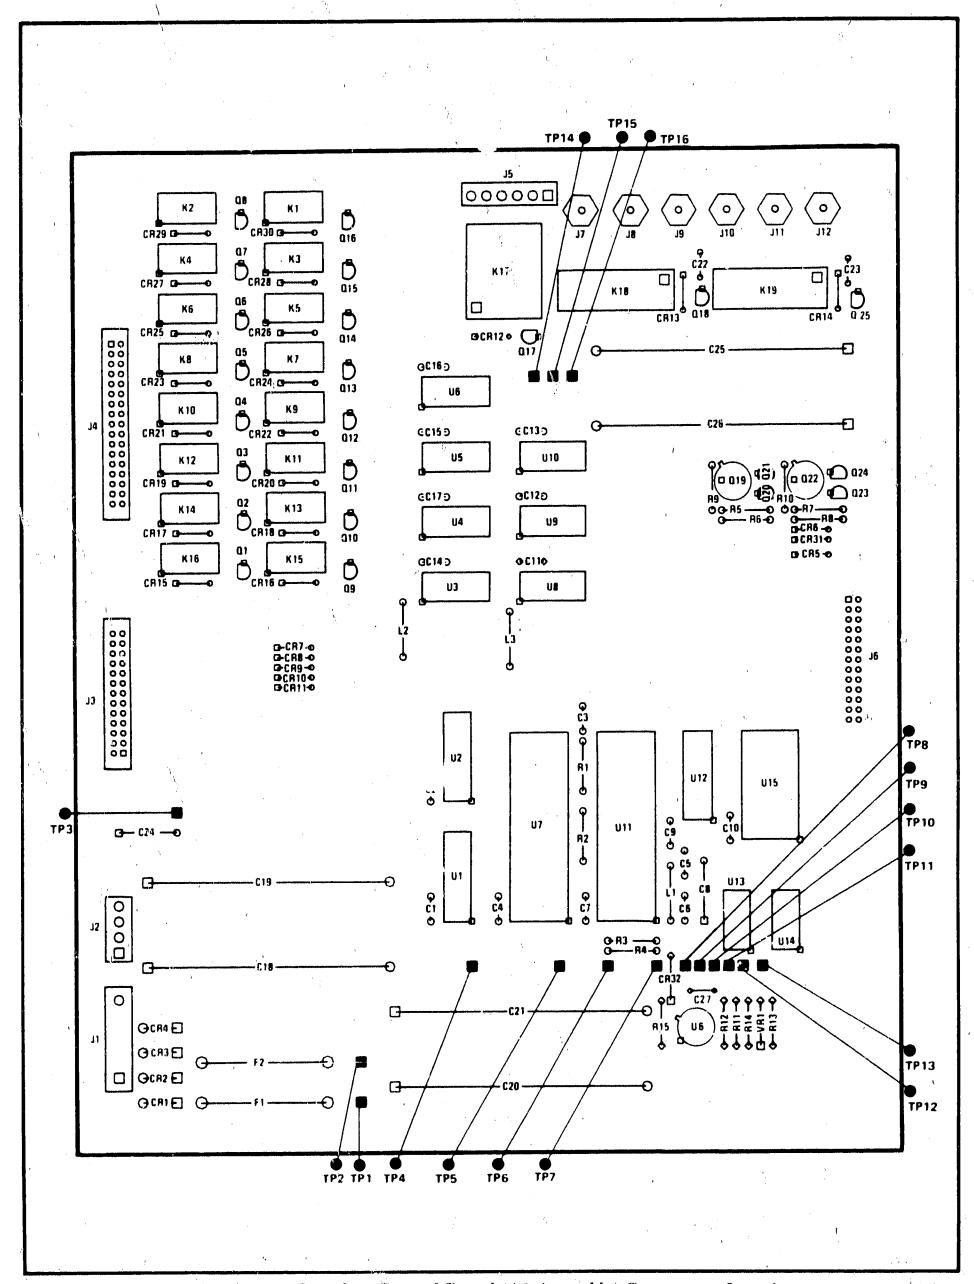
Interface Control Board (A2 Assembly) Component Locations
